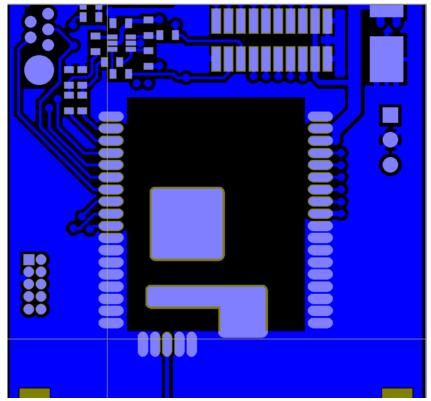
Recommended Carrier Board Pad Dimensions and Locations
